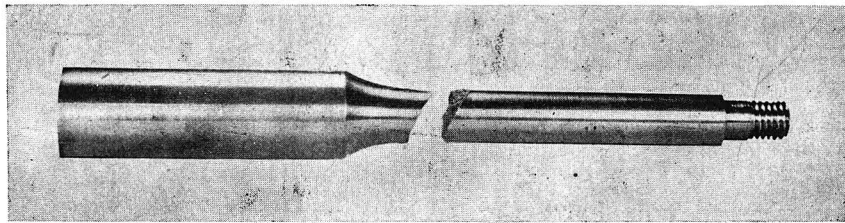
Fatigue Fracture of Brass in Rotating Bending Test of Cantilever Type.
